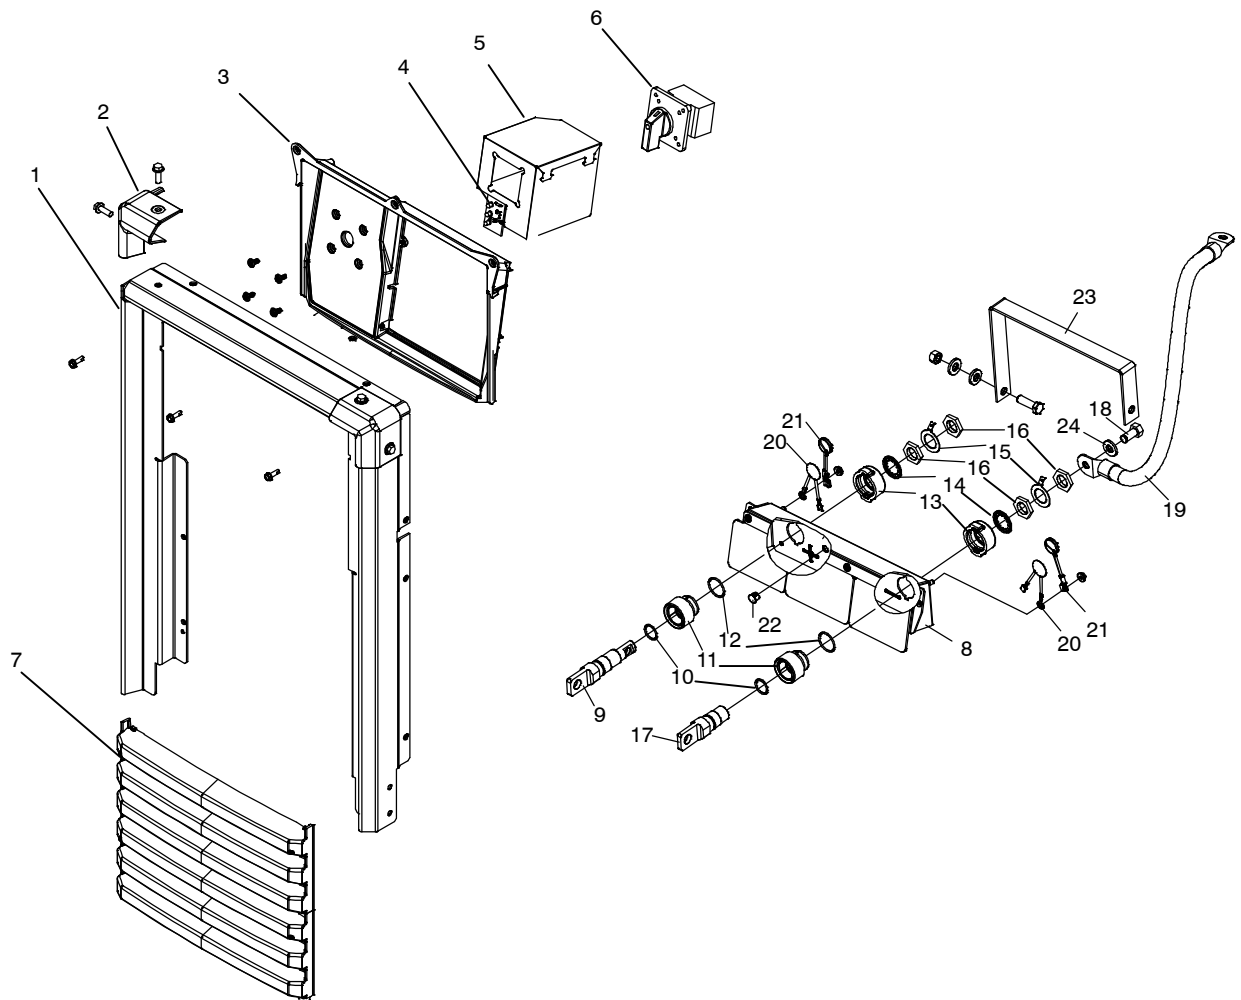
Fan Panel Assembly (Figure 12-1, Item 6)
